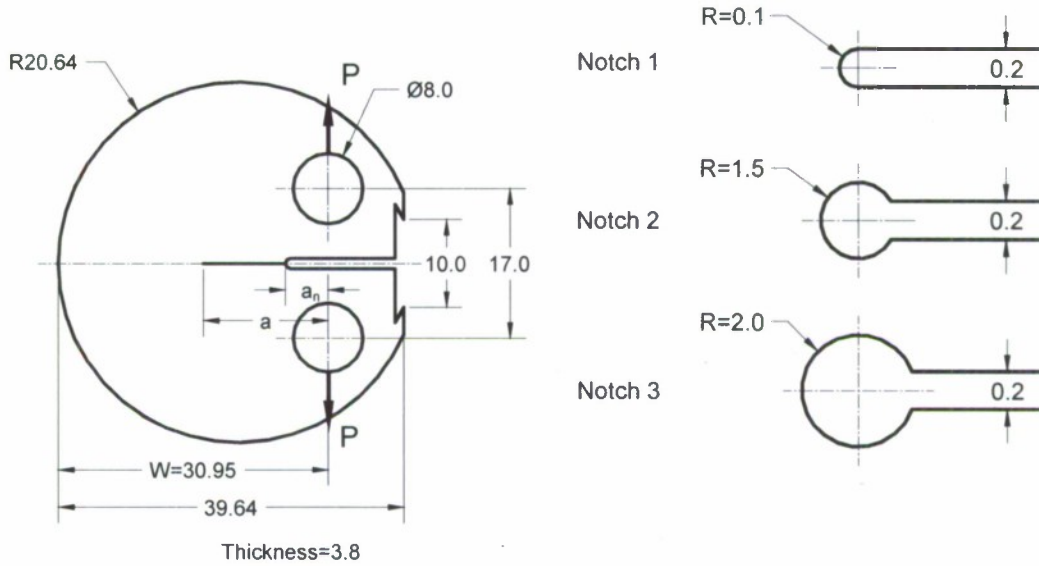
Design of the compact tension specimen for AISI 304L stainless steel
